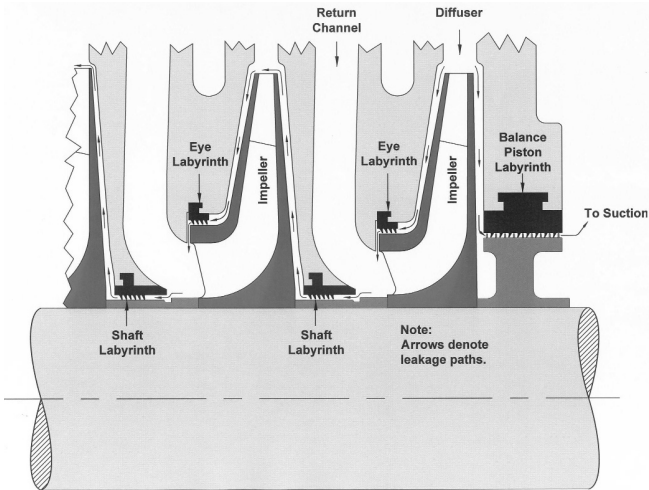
Partial Section Through a Typical Centrifugal Compressor Illustrating Eye, Shaft, and Balance Piston Seals as Well as Typical Leakage Paths.
